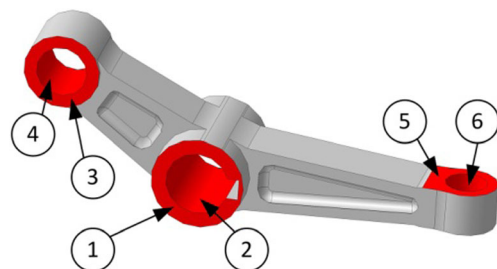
Manufacturing steps during lever machining on the CNC multiaxis machining operation (fragment)
